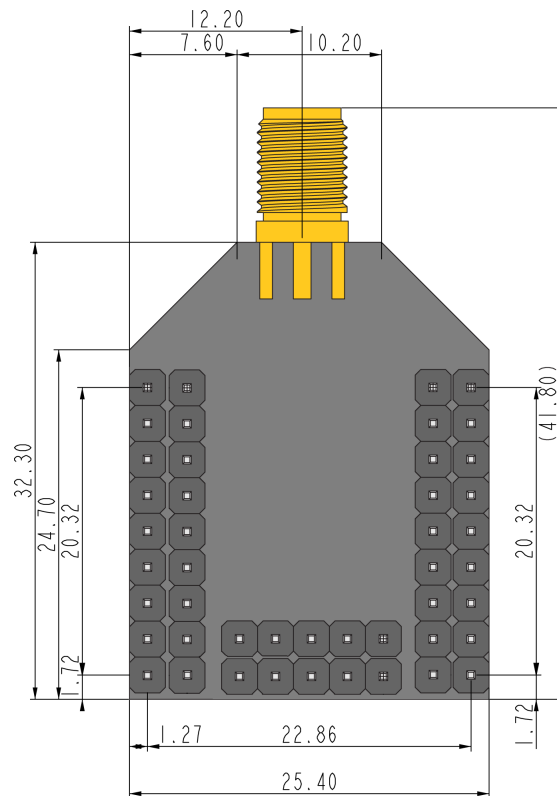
RAK3272-SiP Breakout Board mechanical dimensions
